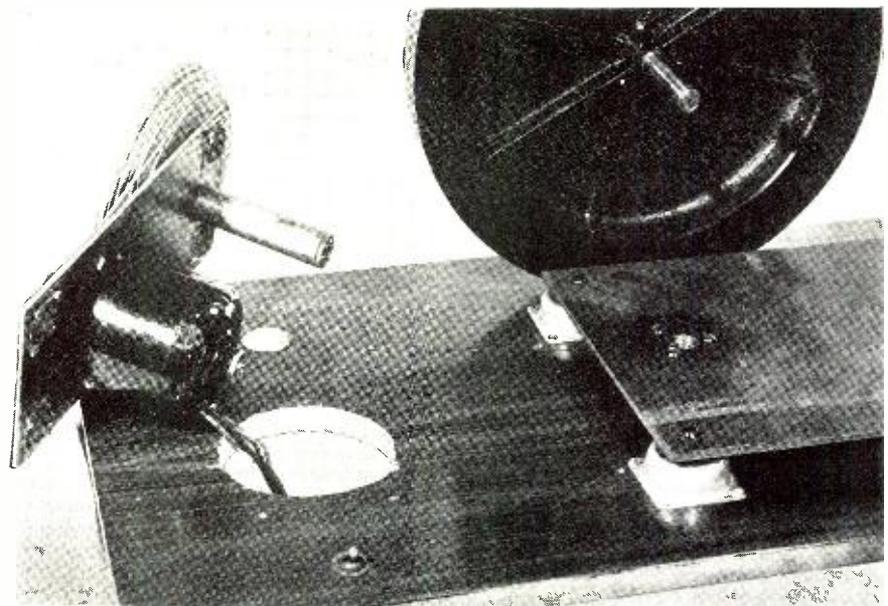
Cut-outs are made in the motor board to fit the motor, etc.
